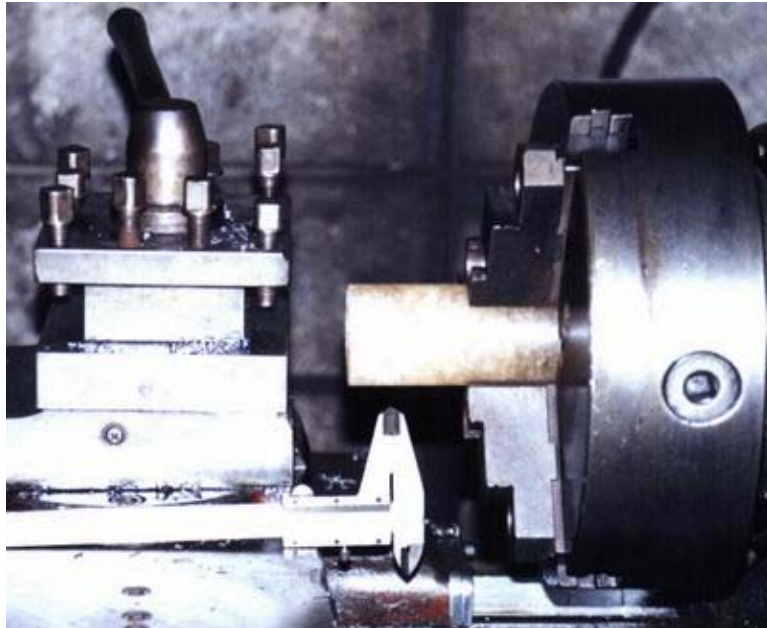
A salt specimen is machined to obtain specified dimensions for the triaxial tests.
